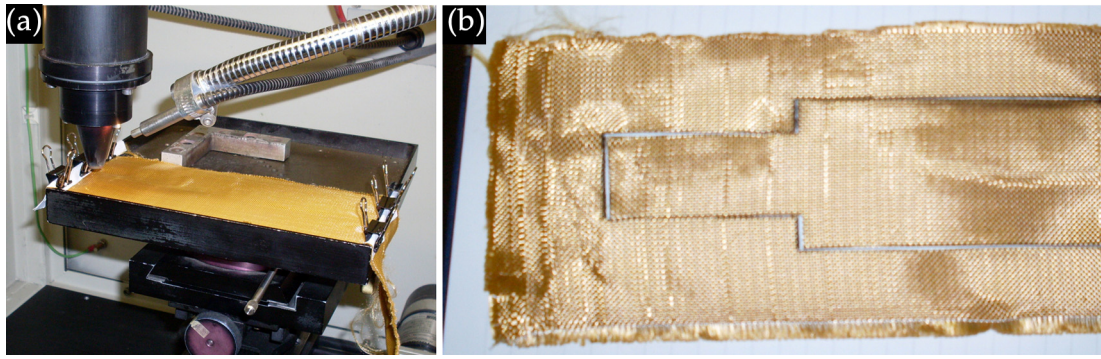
(a) Zylon fabric being cut using the laser cutter; (b) the shape of the cut in the fabric.
